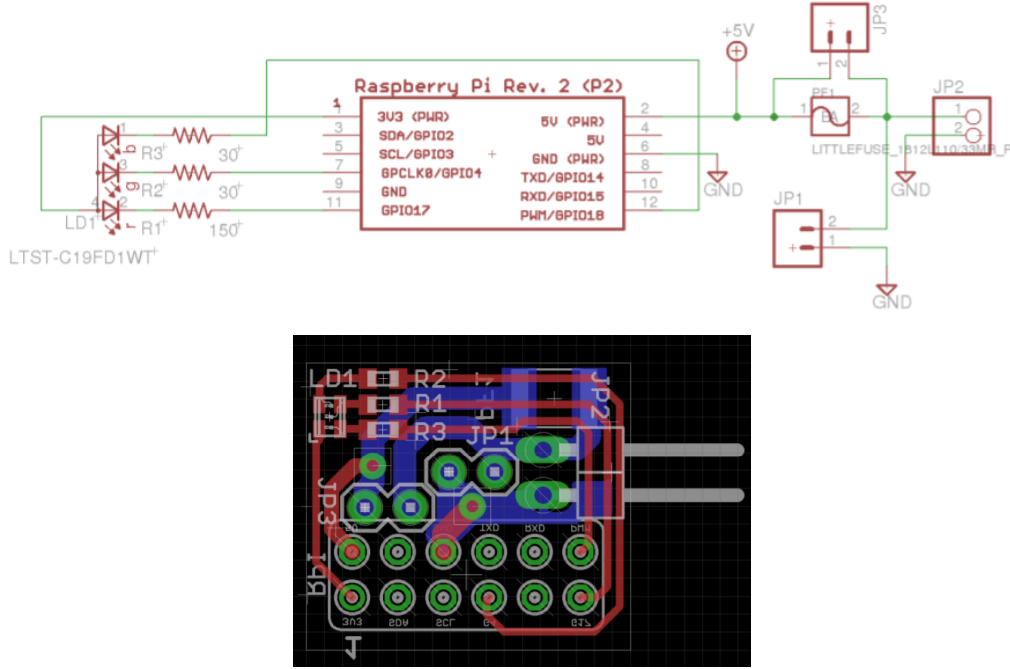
The PCB card's electronic schema and drawing in Eagle CAD.[83]
